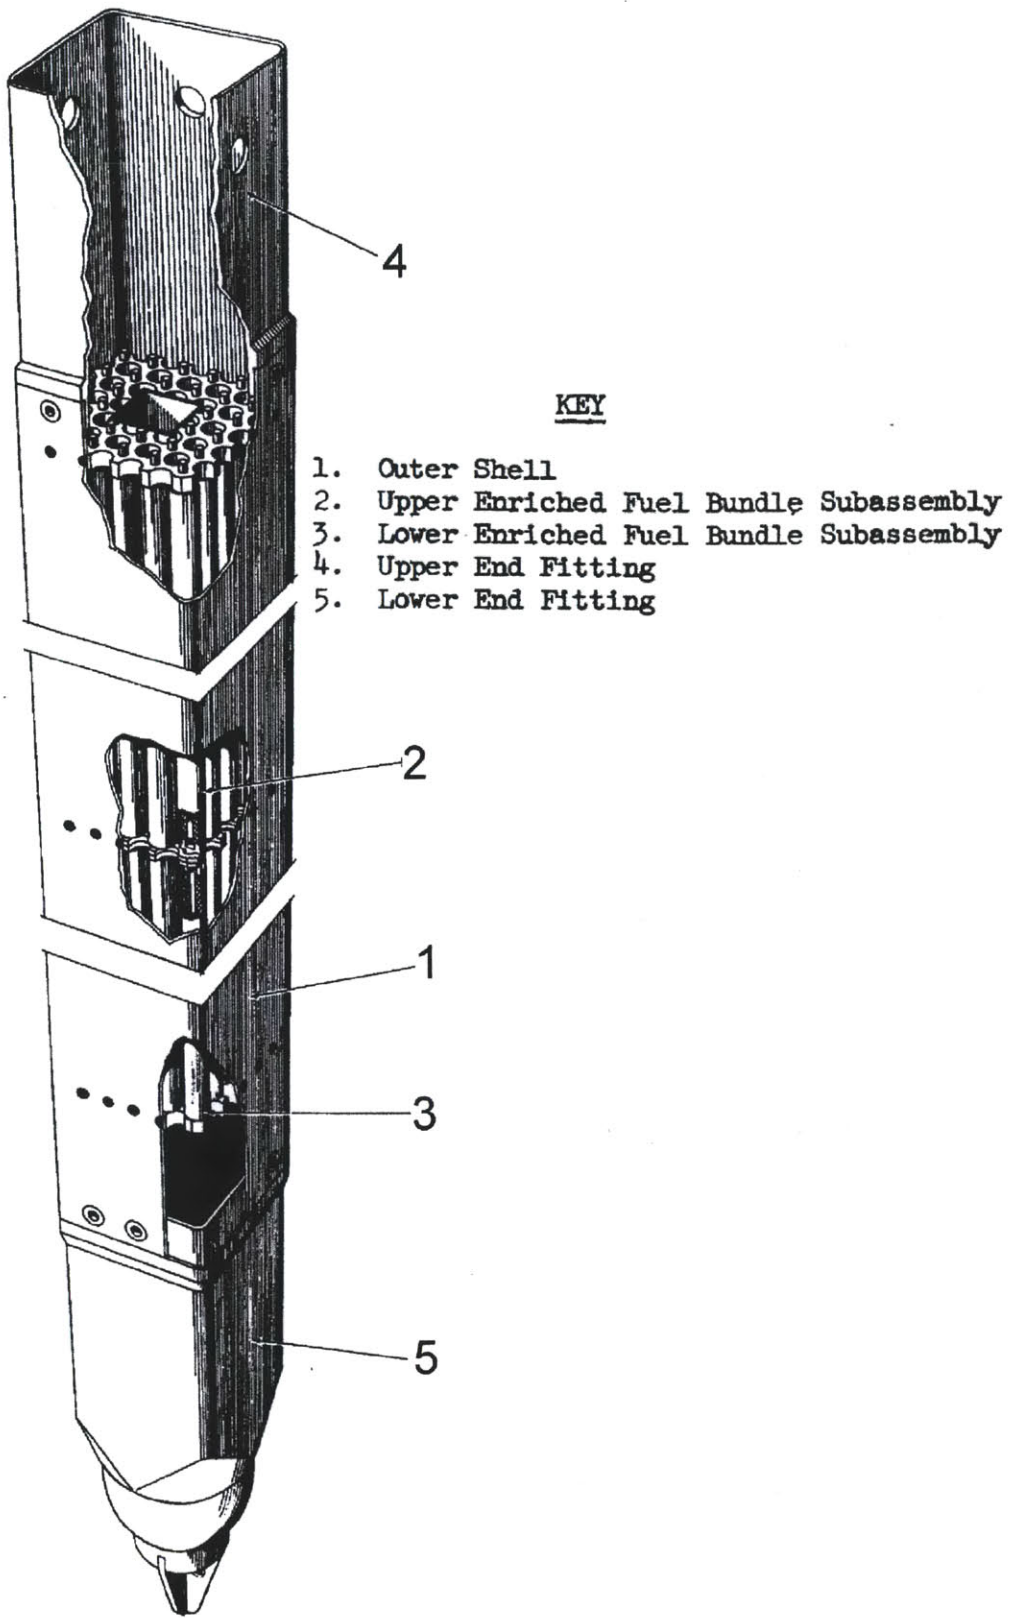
Perspective of the BONUS boiler fuel assembly [39]
